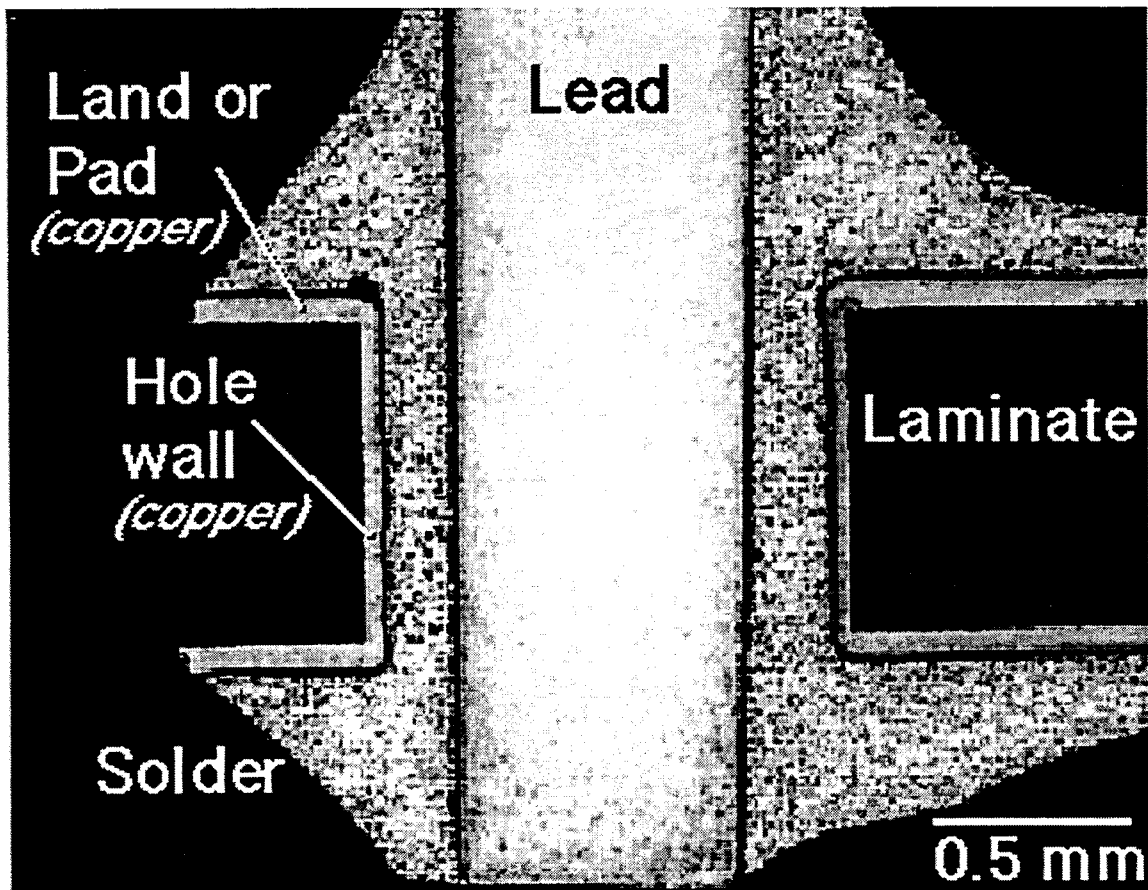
Plated through-hole solder joint used in present-day printed circuit board technology.
